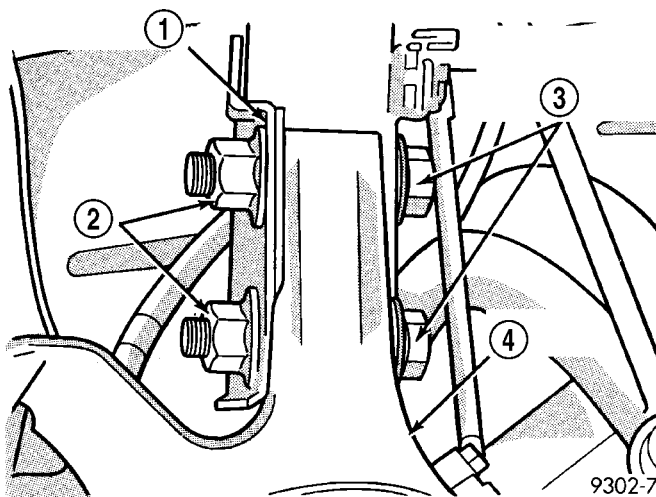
Strut To Steering Knuckle Attaching Bolts
